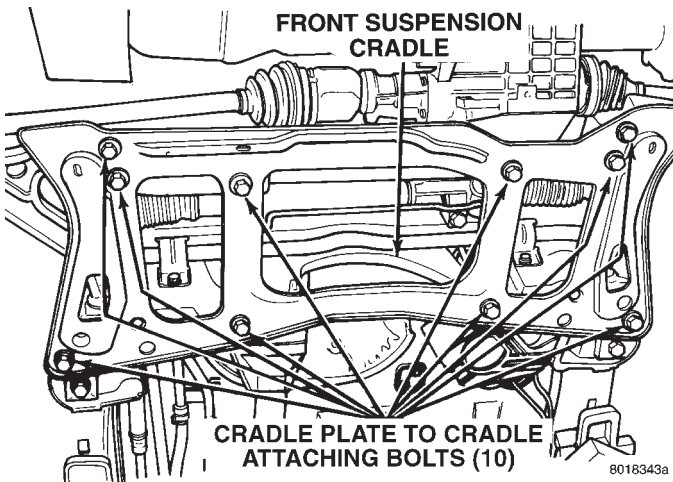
Front Suspension Cradle Plate And Attaching Bolts
